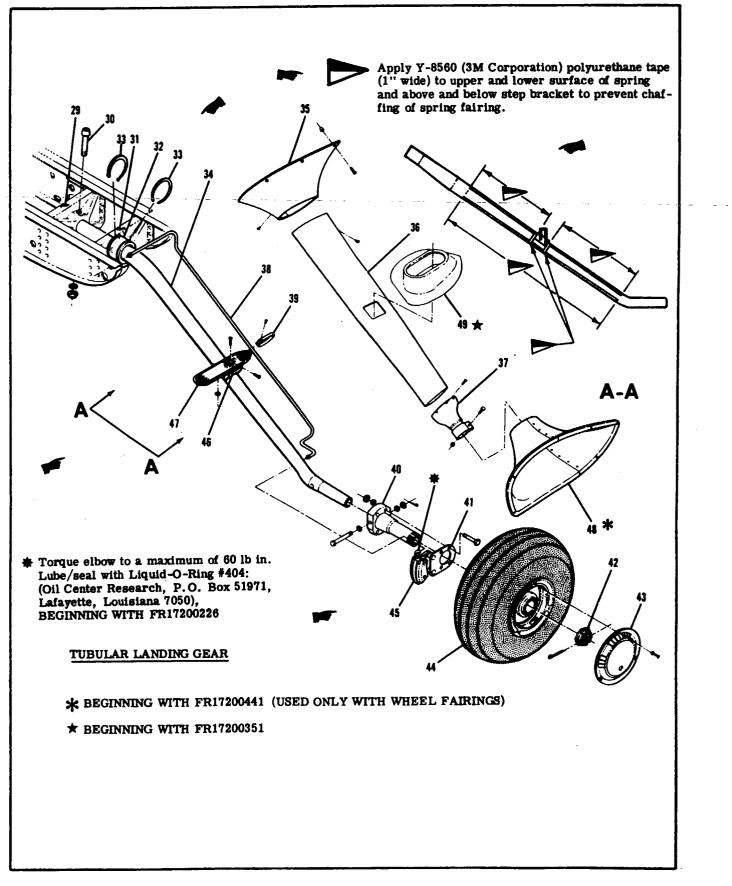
Main Gear Installation (Sheet 2 of 2)
